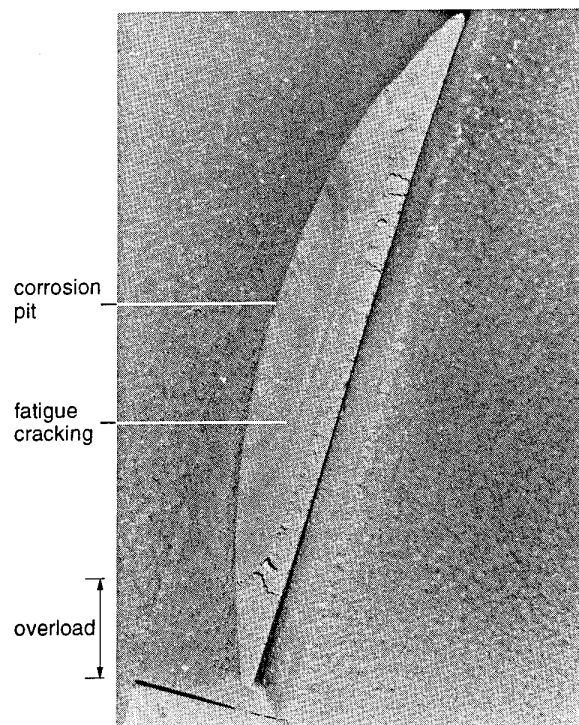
Compressor blade failure in an industrial gas turbine compressor (see figure 1a): blade material 403 steel
